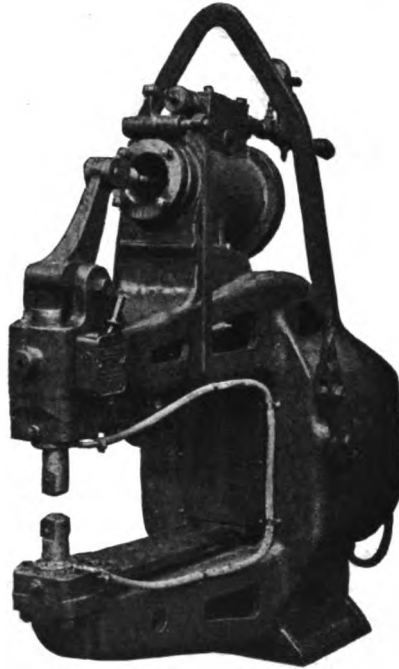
ELECTRIC WELDER—27 INCH REACH
